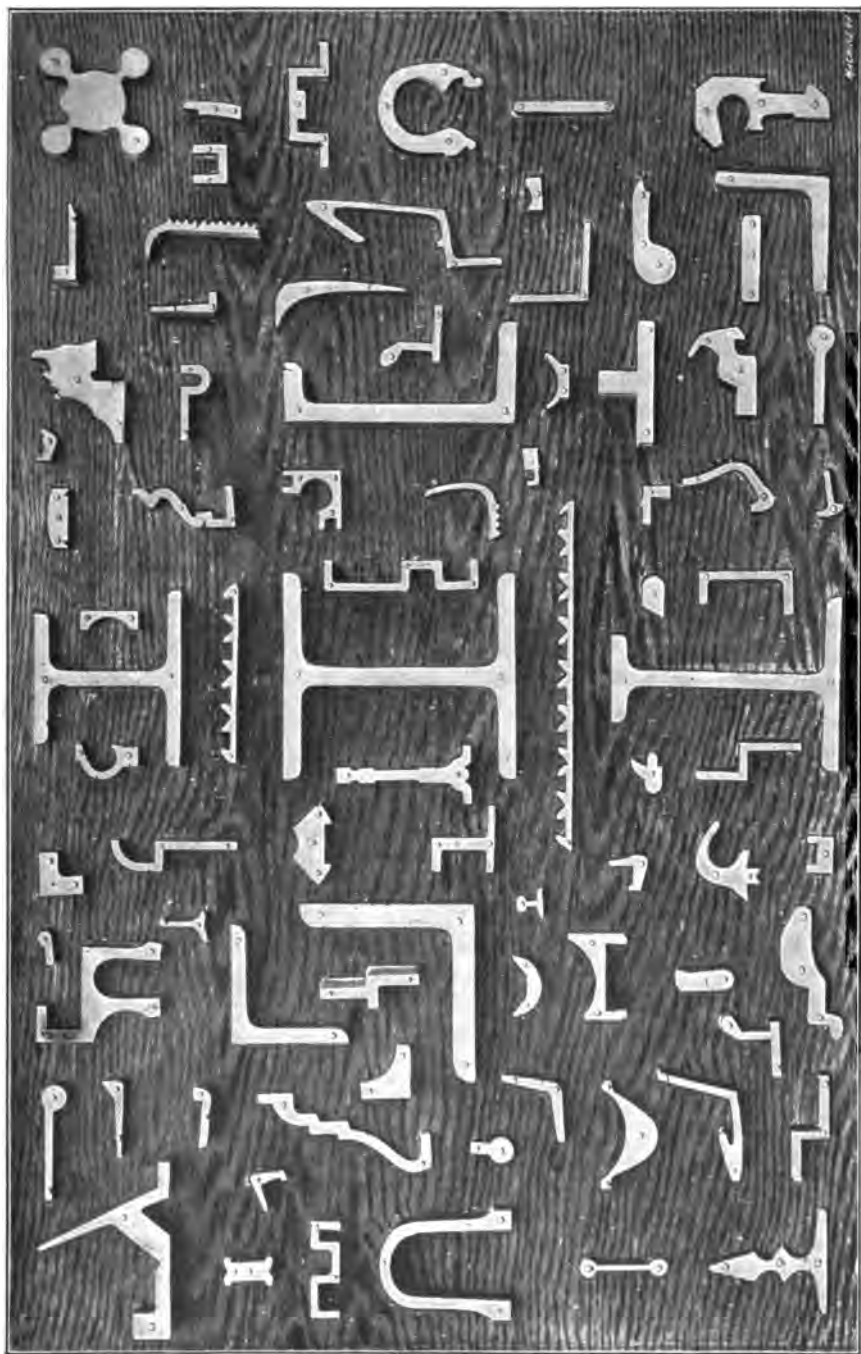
Examples of Extruded Metal Shapes produced by the Coo Brass Mfg. Co.
